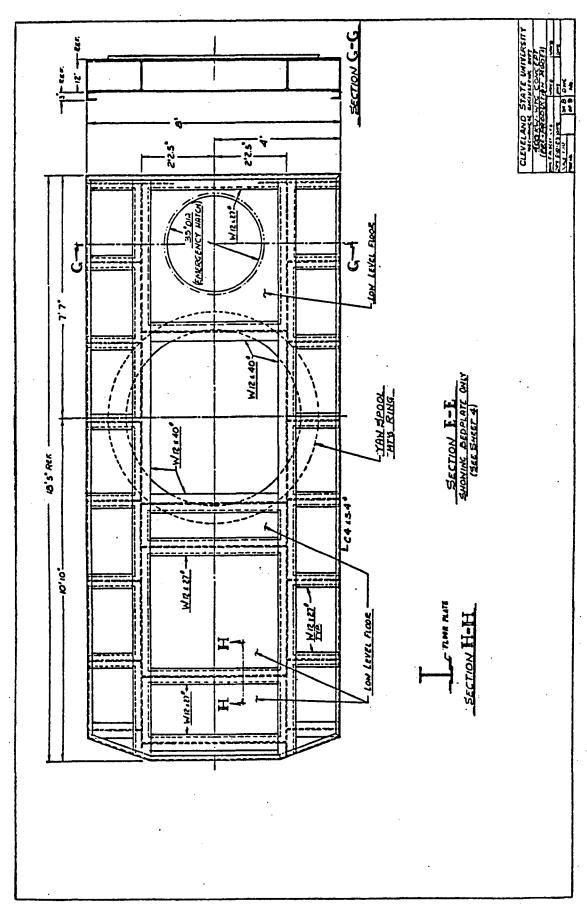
NACELLE LAYOUT OF WTG-OUTSIDE VIEWS
